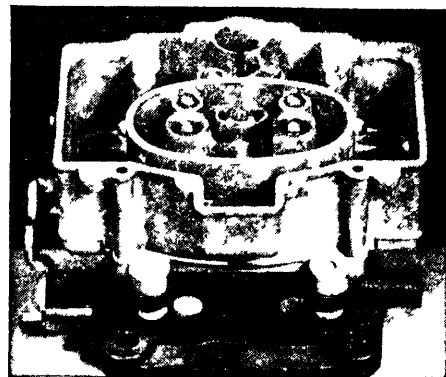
Assemble main body and throttle body. Assemble main discharge jets (tool T-24967). Be sure they are positioned so that flat surface of jet is parallel with direction of air flow. Use new lead gasket if one was originally supplied (some models do not have gasket). Assemble main metering jets (tool T-24924) and main jet plugs
